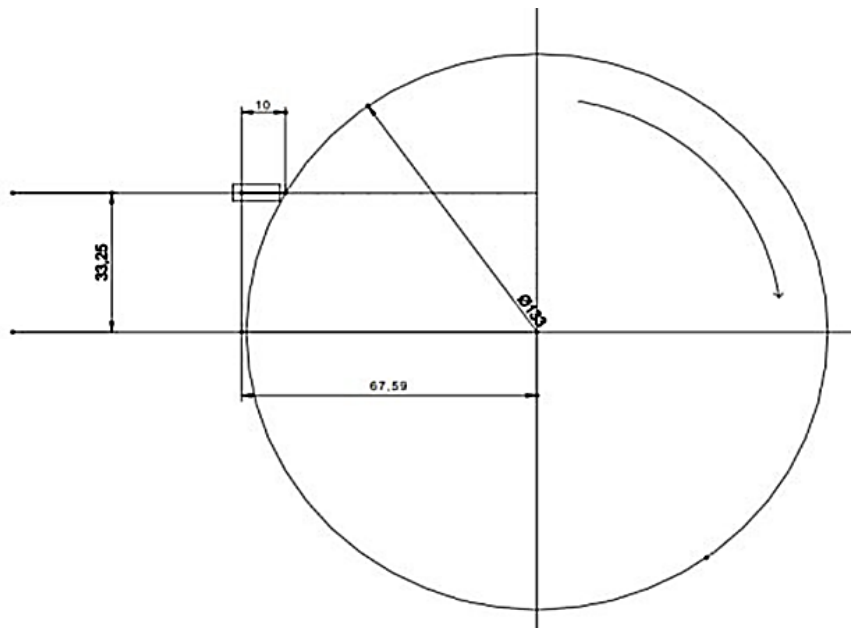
Positioning of the welding torch during surfacing
